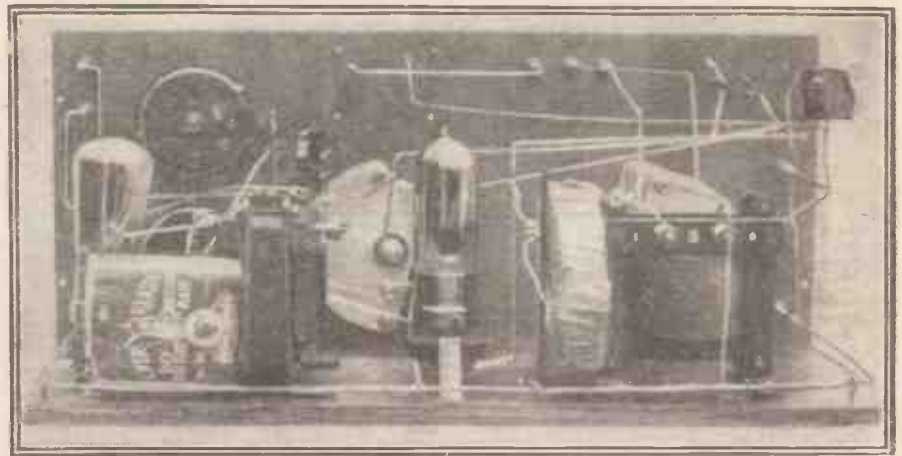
The back of panel wiring and lay-out can be clearly seen from the above photograph.
